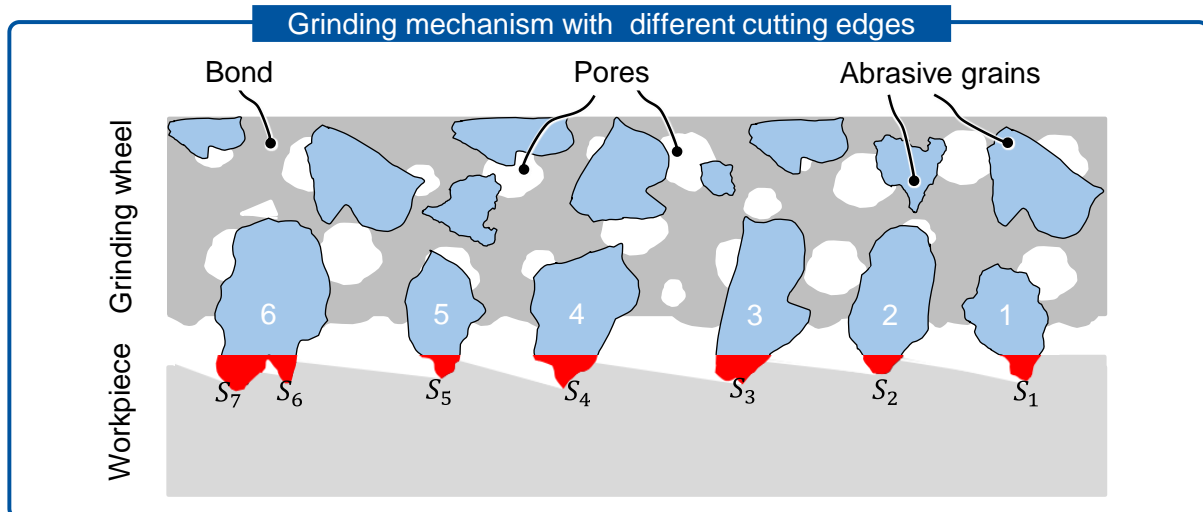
Cutting edges in the grinding wheel [KLOC09]
